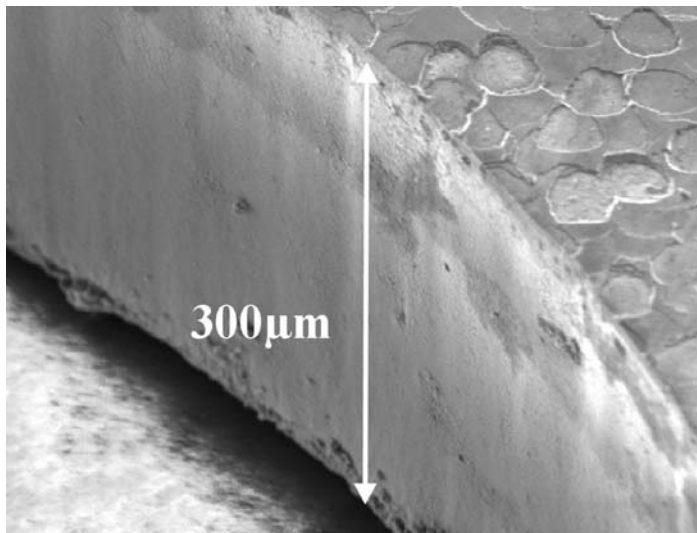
Cutting holes in 300 μm silicon wafer with a STACCATO laser
